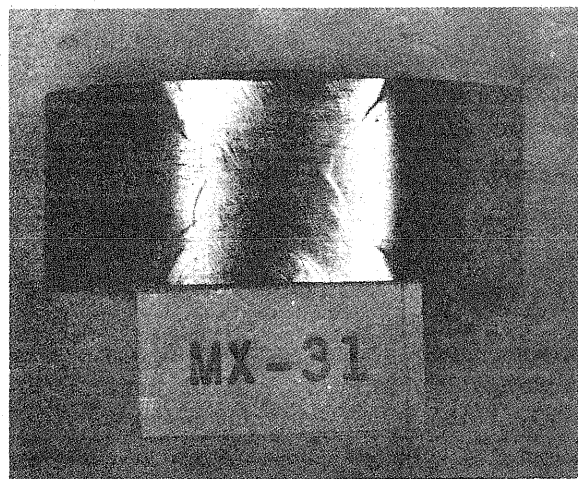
WELDING PROCEDURE P130(T)-M140-A
